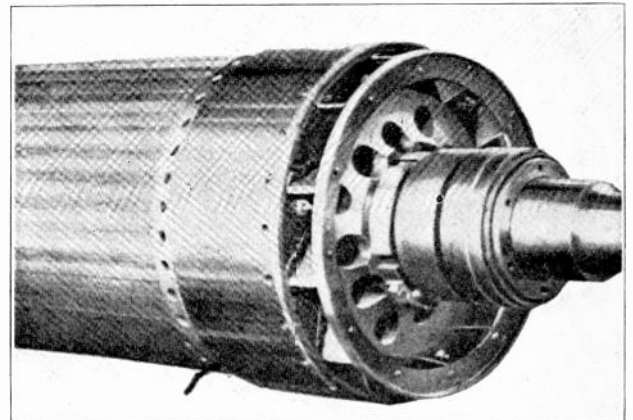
End-view of high speed field rotor showing shield ring over the coil ends and also showing ventilating plates and slip rings.
